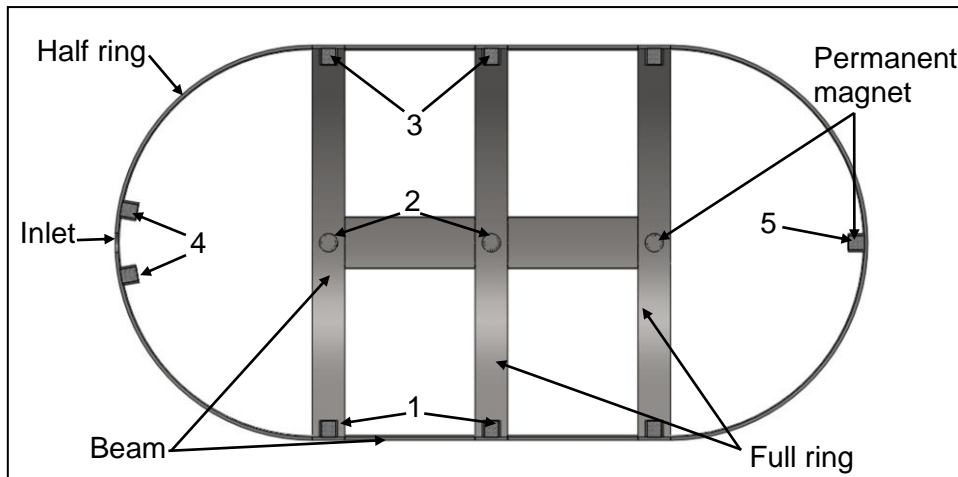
Right sectioned view of the CAD model of the outer vessel support frame which holds permanent magnets.
